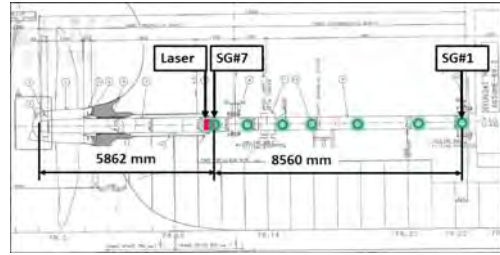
Shafting arrangement and position of strain gauge and laser sensor
